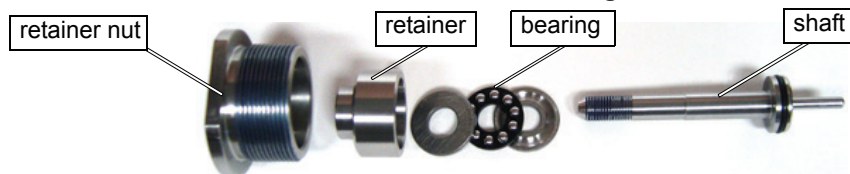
Removing the Retainer Nut, Retainer, and Bearing from the Shaft
